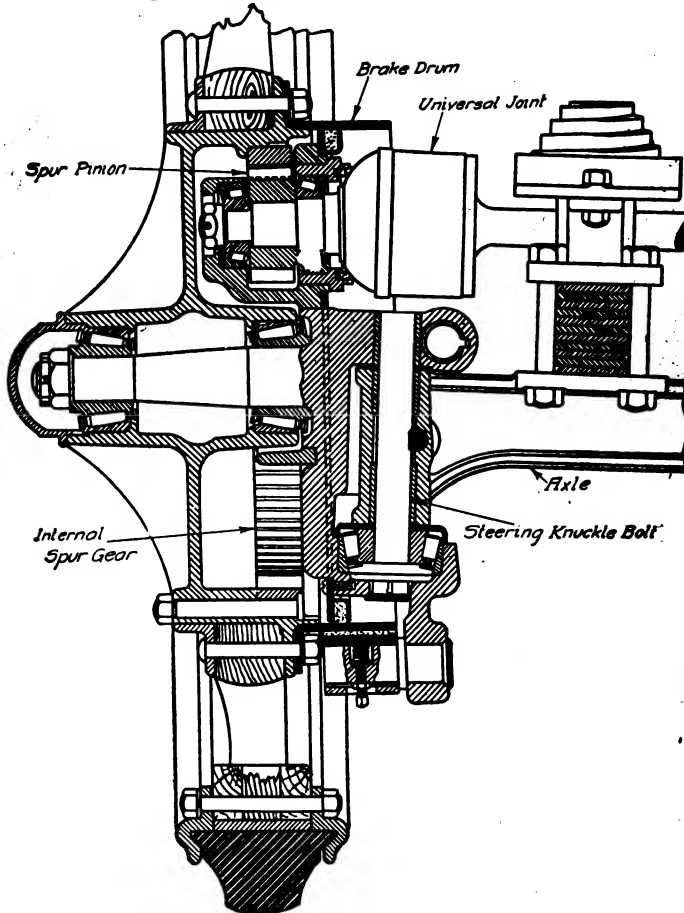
Sectional View of Jeffery Front-Wheel Drive
